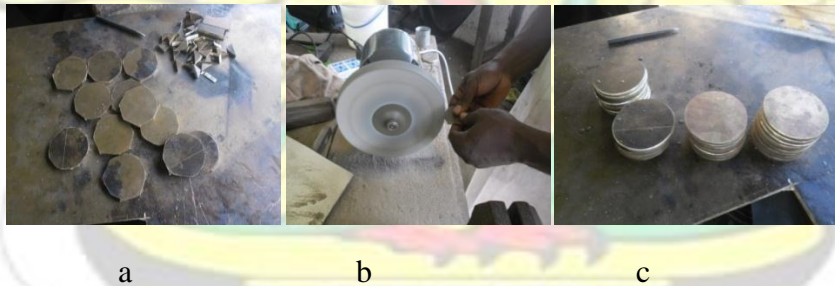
Brass squares, 27b: Grinding & 27c: Finished blank samples
